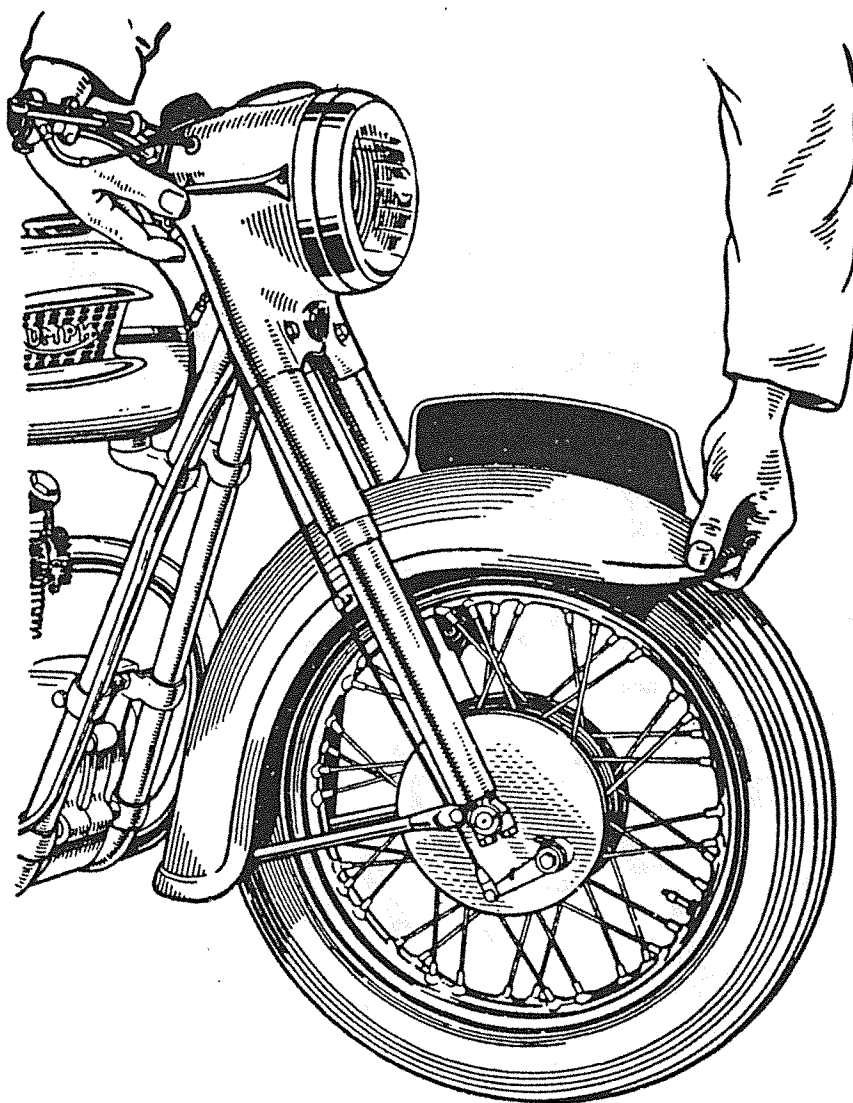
TO TEST THE ADJUSTMENT OF THE STEERING HEAD RACES.
